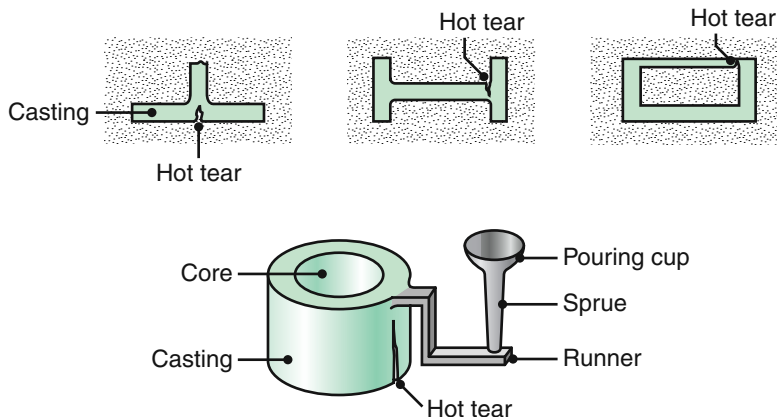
Examples of hot tears in castings. These defects occur because the casting cannot shrink freely during cooling, owing to constraints in various portions of the molds and cores. Exothermic (heat-producing) compounds may be used (as exothermic padding) to control cooling at critical sections to avoid hot tearing.
